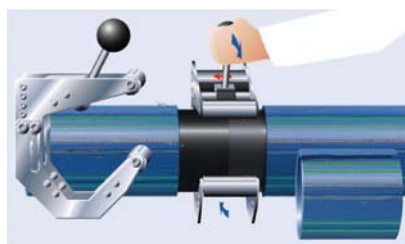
Removal of the oxide layer using a suitable scraping tool
